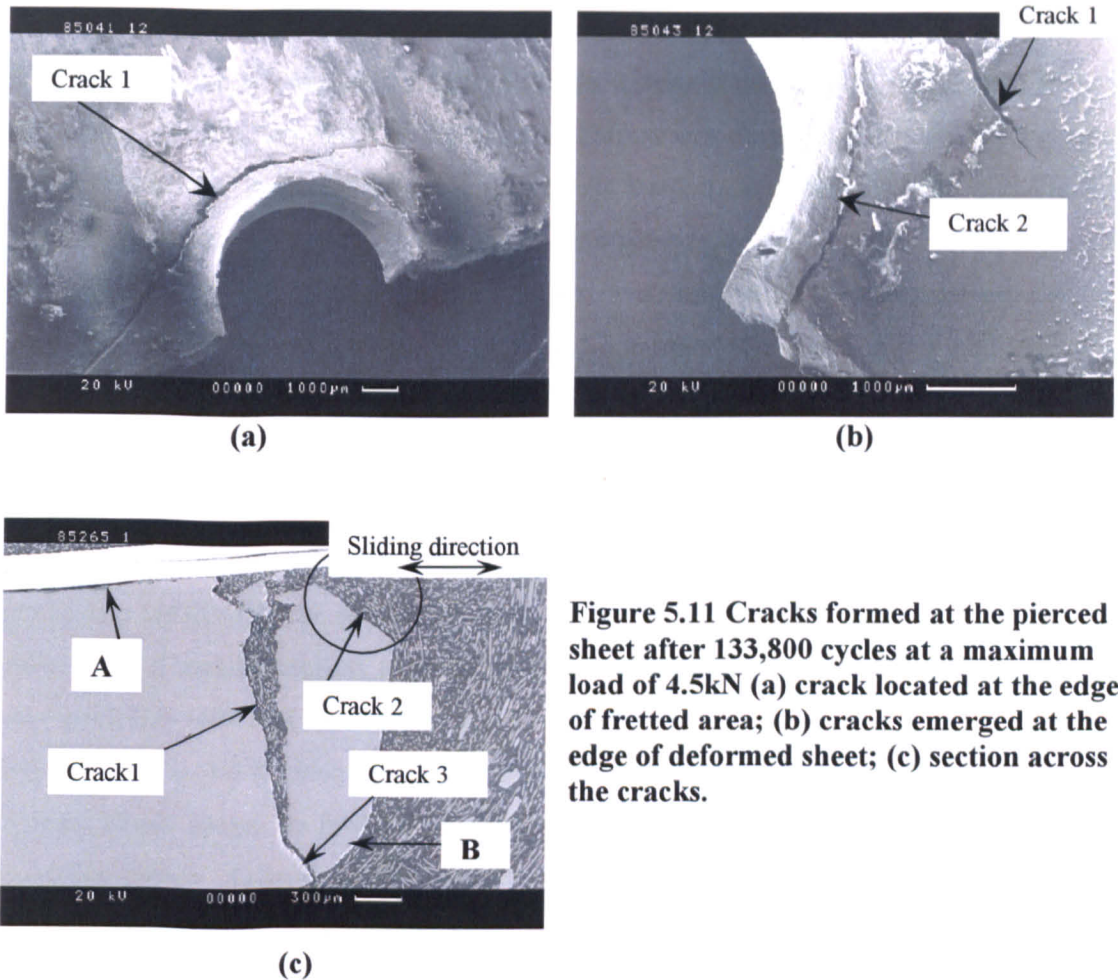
Cracks formed at the pierced sheet after 133,800 cycles at a maximum load of 4.5kN (a) crack located at the edge of fretted area; (b) cracks emerged at the edge of deformed sheet; (c) section across the cracks.
